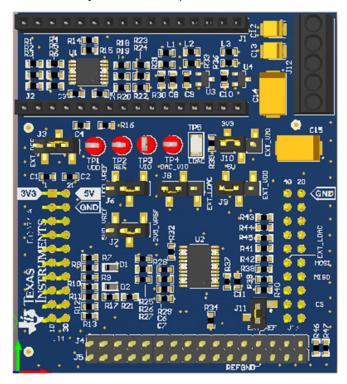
BOOSTXL-DAC-PORT PCB Components Layout
